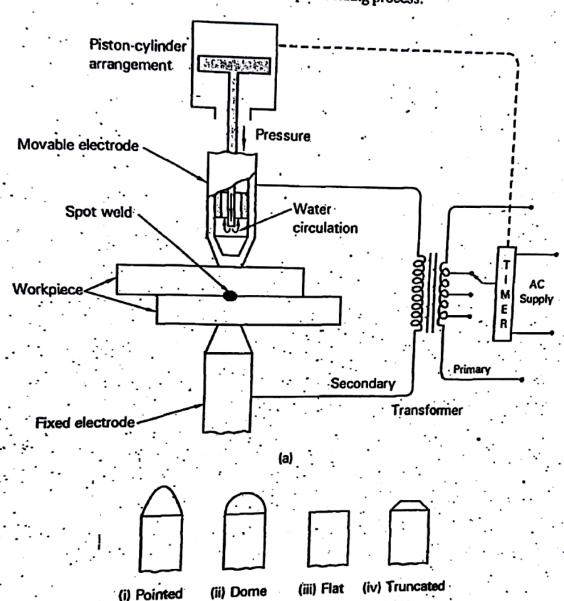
I(a) shows the details of a resistance spot welding process.
